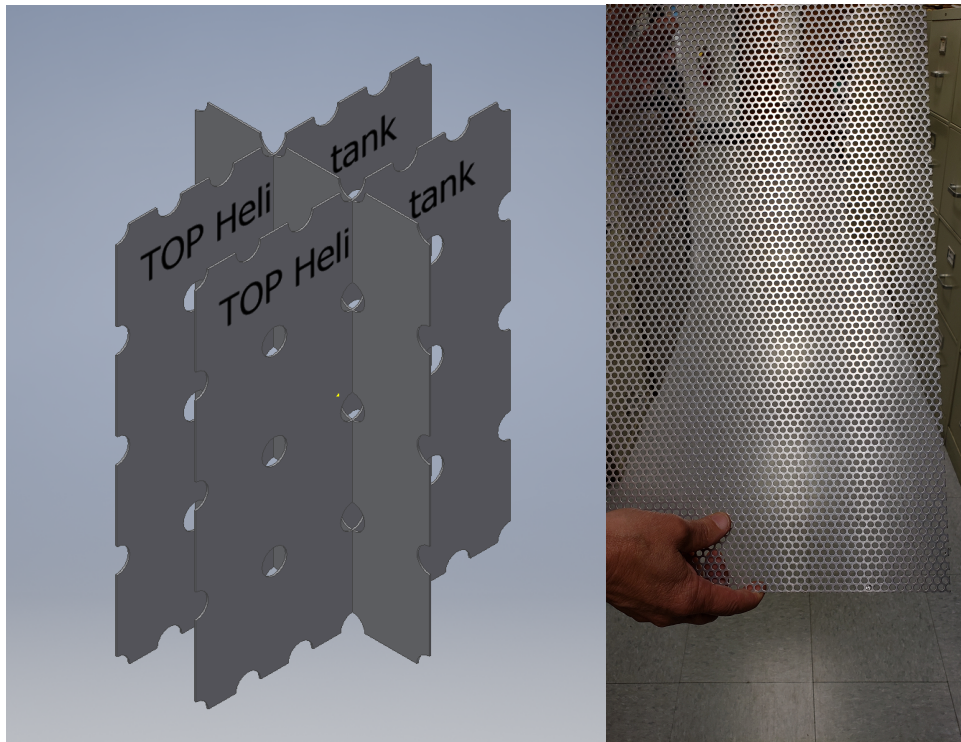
Left: CAD model showing the design of the baffle for the helium tank, which should minimize sloshing of the liquid without forming independent cavities. A similar baffle will reduce sloshing in the nitrogen tank. Right: Perforated aluminum sheet metal actually used in the cryostat. Image by Dick Gummer at Precision Cryogenics.
